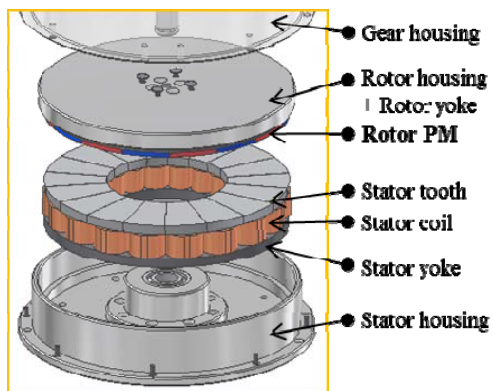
Single-sided axial flux machine with PM rotor and slotted stator [81].
